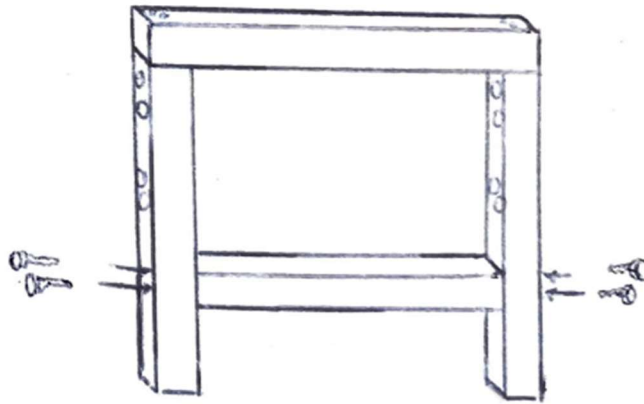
Attaching screws to connect second part of the frame subsystem.
